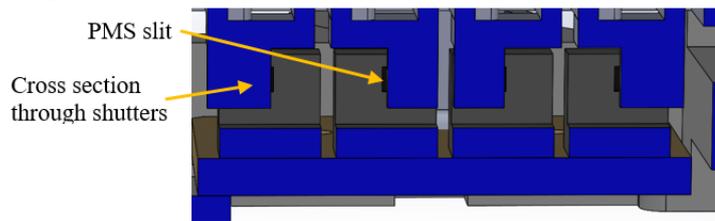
Assembly cross-section showing shutter partial coverage of detector slit
